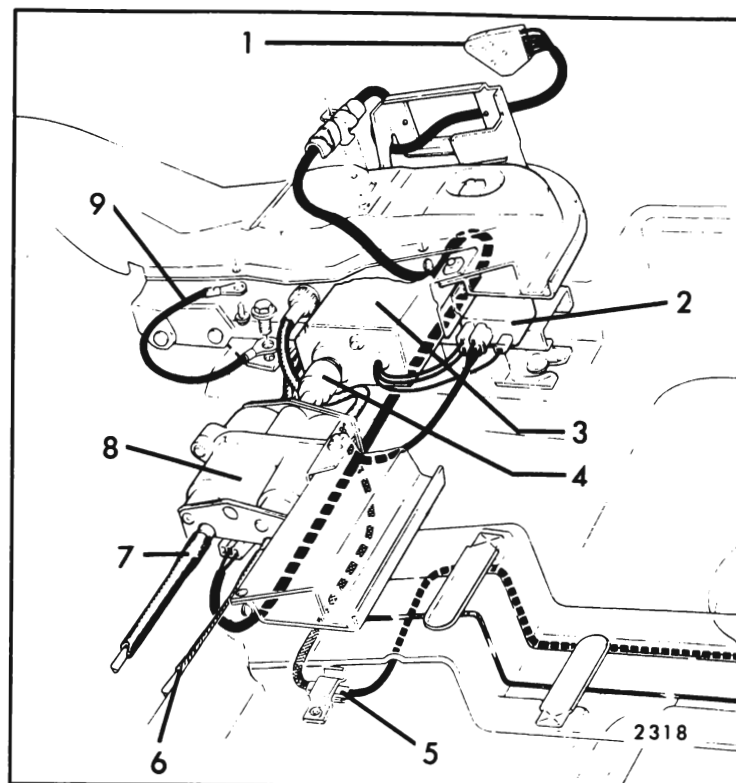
Four-Way Bench Seat Wiring - "A" Body Styles
